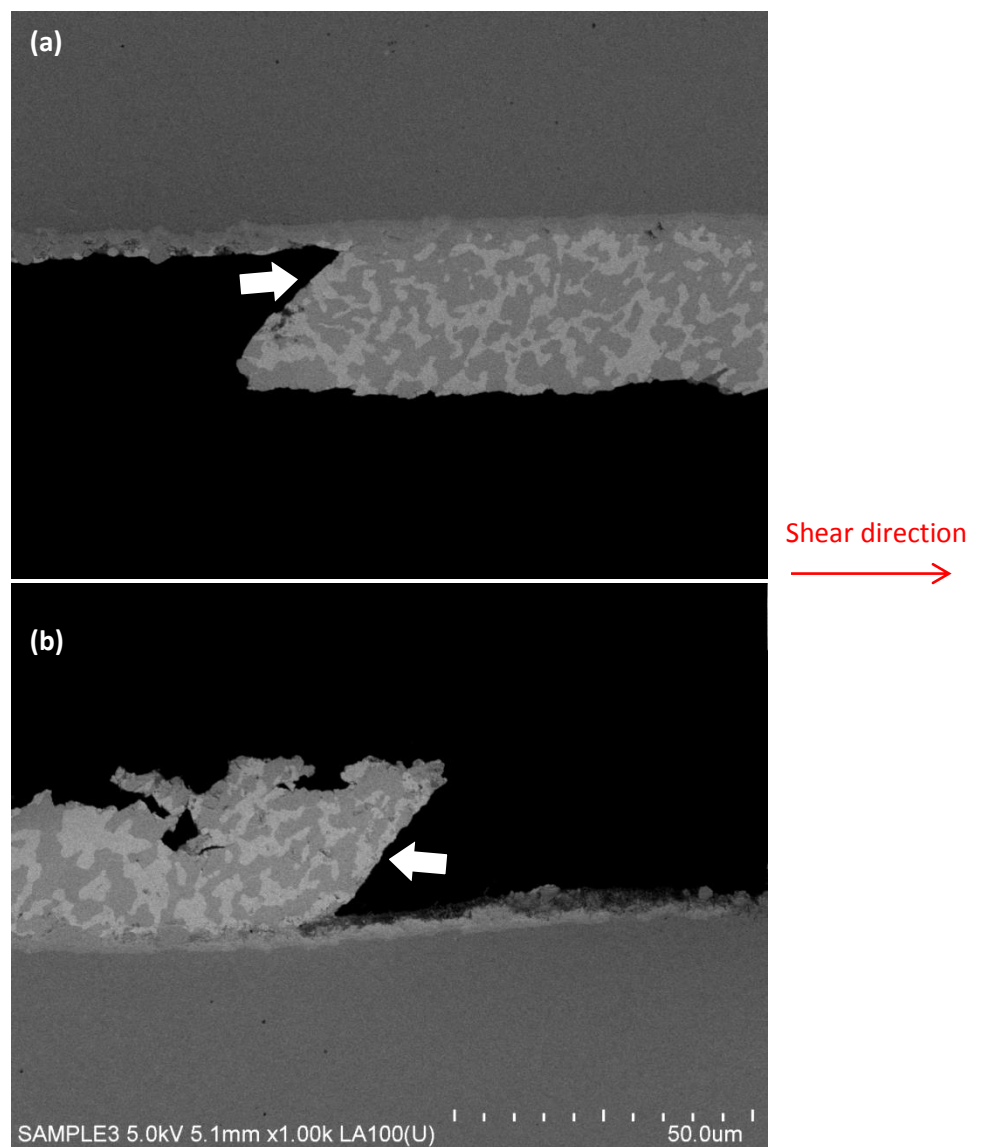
Cross sectional FESEM view of fractured solder joints reflowed at 260°C (a) top half (b) bottom half (strain rate  $4 \times 10^{-4}$ /s).
